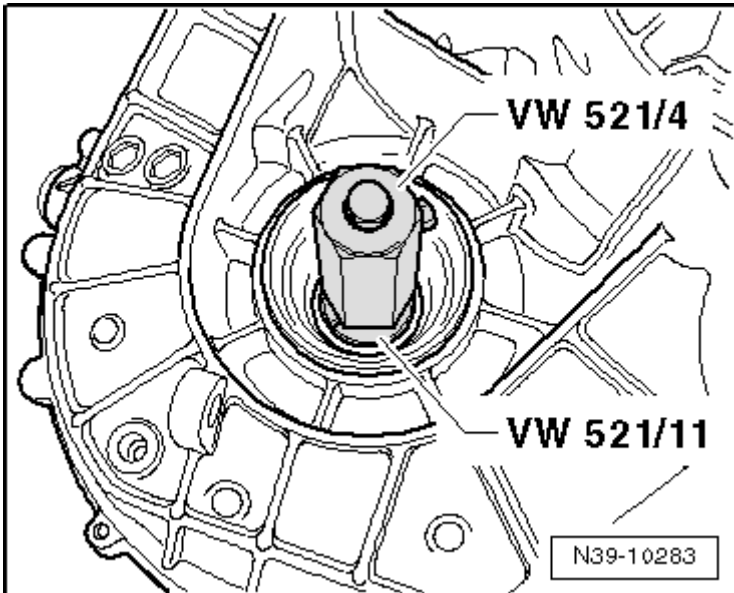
Identifying Special Tools - VW 521/4 VW 521/13
